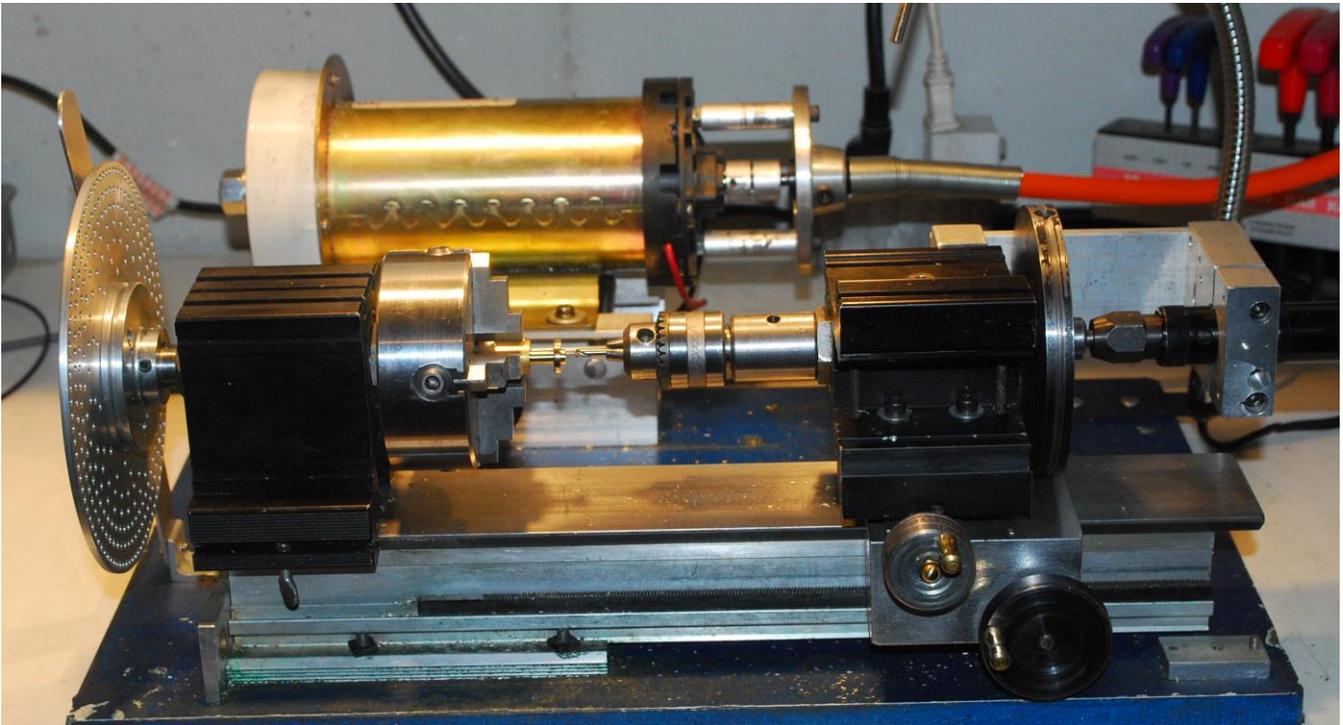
Using a second headstock as a milling spindle to drill and tap the wheel mounting holes of a collet. As with wheel cutting, an index plate is attached to the headstock on the left. The right headstock is laid on its side and bolted to the cross slide. An aluminum plate (not shown) establishes the correct center-to-center height. The point of the center drill bit is aligned with the center of the collet, and then advanced $3/16$ " , which is the radius of the wheel mounting screws. The orange flex cable attached to the right side of the motor drives the spindle.
